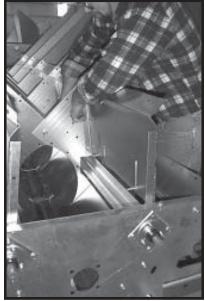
Bolting (2) meter roll upper shield assemblies on hopper bulkhead.
